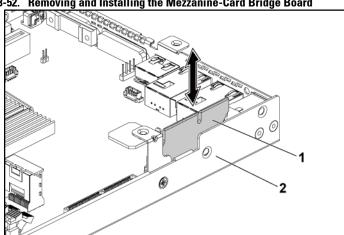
Removing and Installing the Mezzanine-Card Bridge Board
